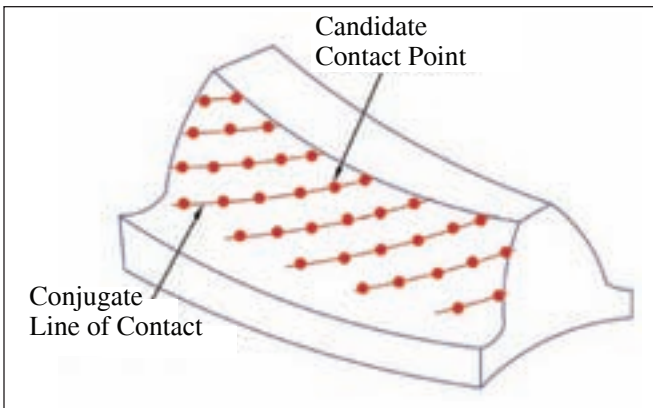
Conjugate lines and contact points on the gear tooth surface.
